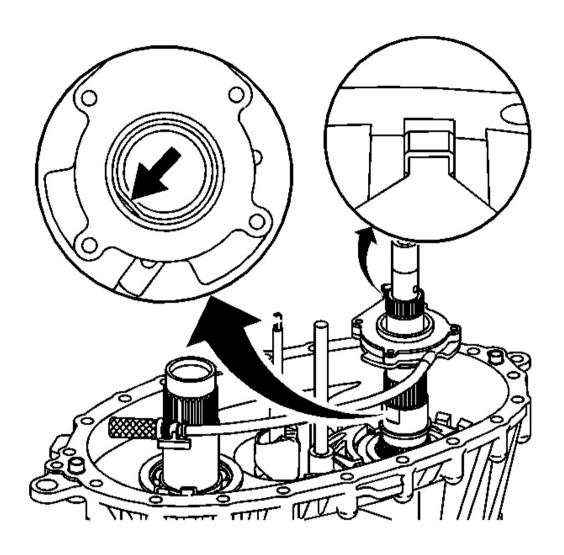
Oil Pump Assembly With Hose & Screen Courtesy of GENERAL MOTORS CORP.
